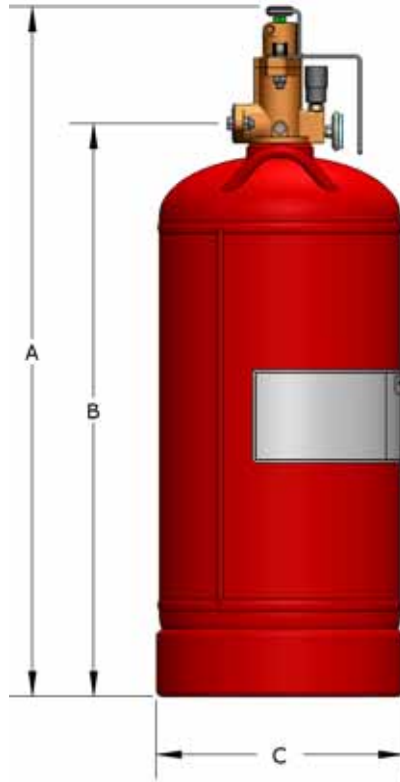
Sentinel DCS Cylinder and Valve Assembly
